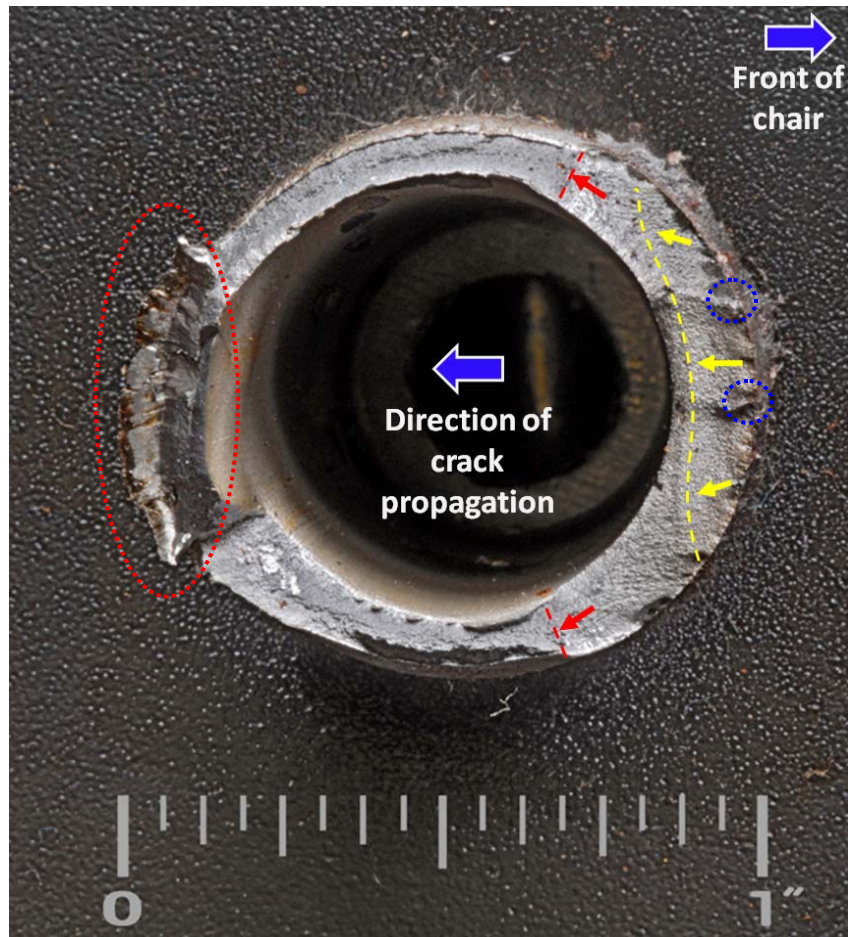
Stereomicroscope image of the cylinder fracture surface showing ratchet markings at the side of the cylinder where crack initiation occurred (blue circles); a beach mark observed on the fracture surface (yellow line); and the distinct area on the fracture surface where the crack path was no longer flat and relatively smooth (red lines). The yellow and red arrows show the direction of crack propagation through the cylinder. Scale is one inch.
